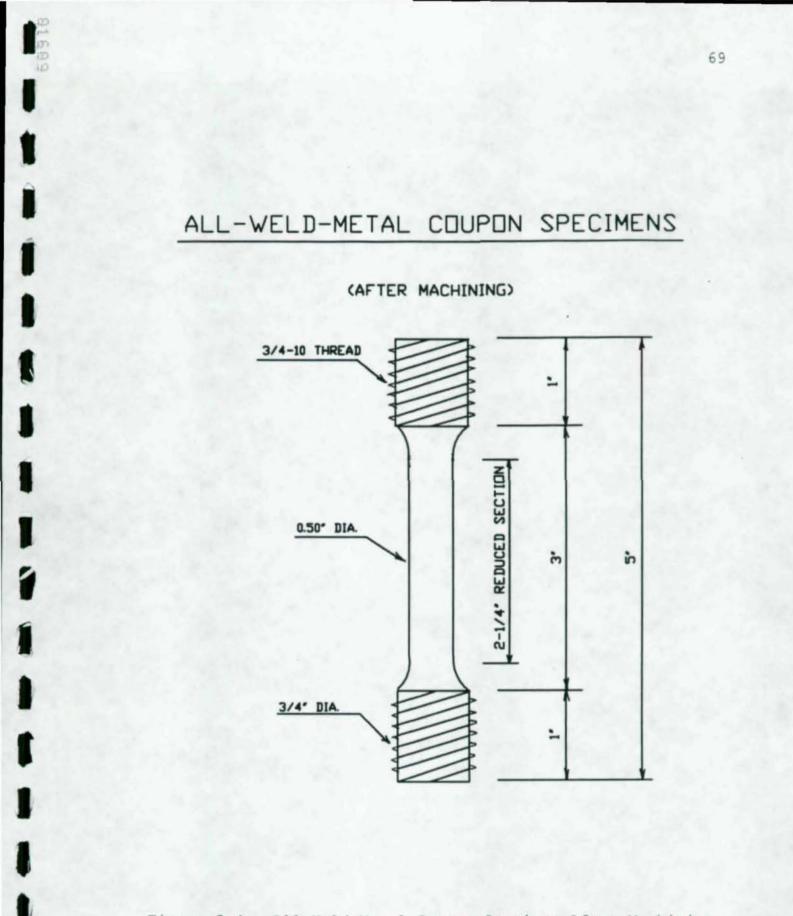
All-Weld-Metal Coupon Specimen After Machining
